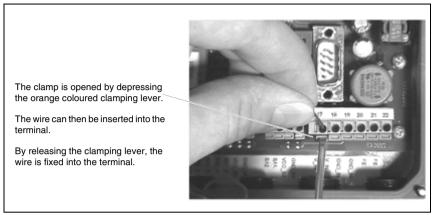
Wiring to the terminal strip without screwing down or soldering
